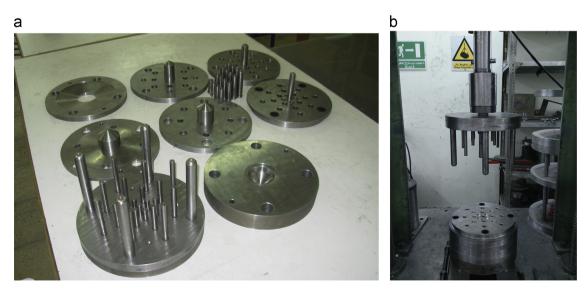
Constructed co-extruder, (a) disassembled parts of the constructed die, (b) assembled die on the pressing machine.
